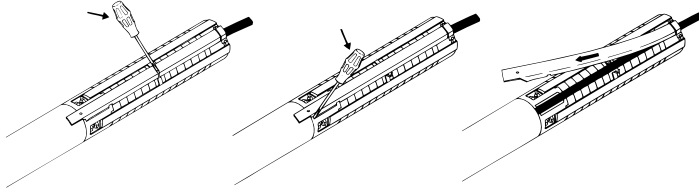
Removal and fitting of cable guard for SP 385S, 475S, 625S, 800S, and 1100S
